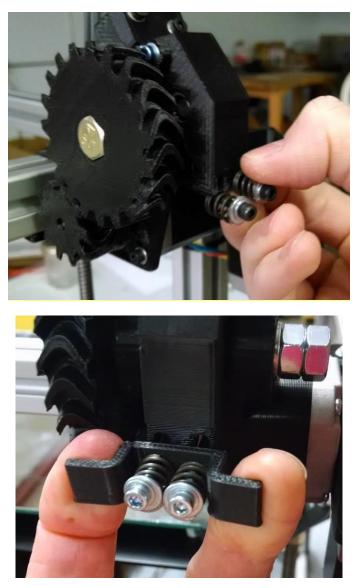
Engaging the Idler Bar Springs (top-original extruder, lower – current extruder)
